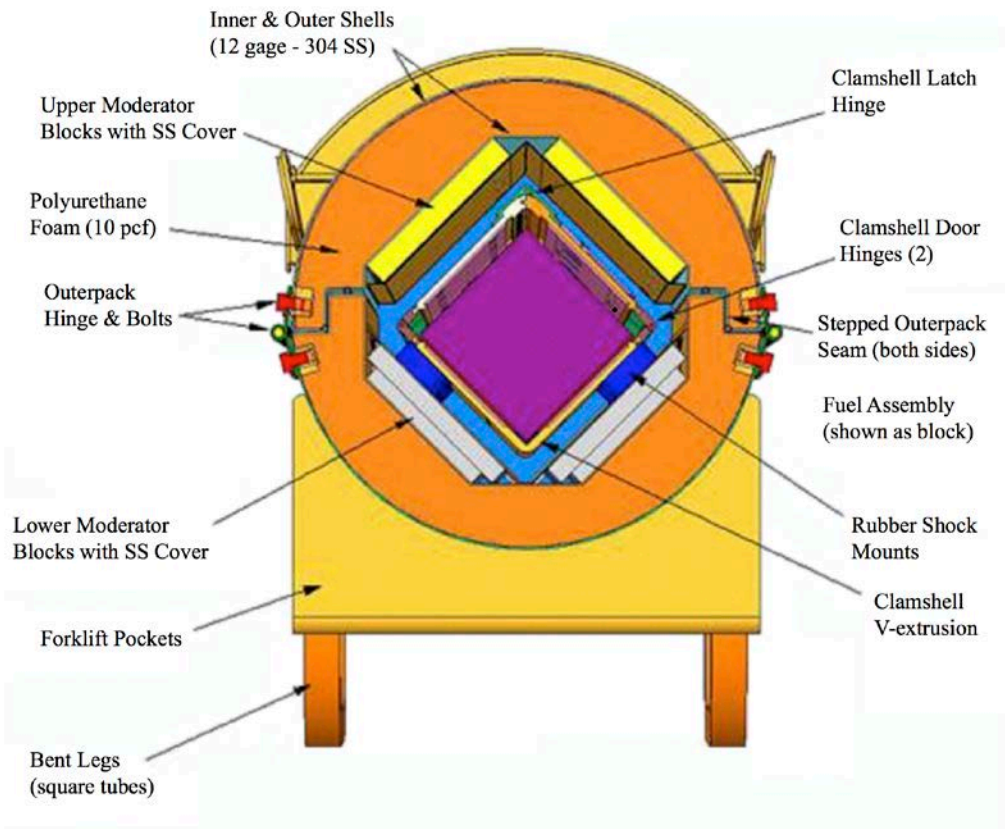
Outerpack and Clamshell Cross-Section View (typical)
